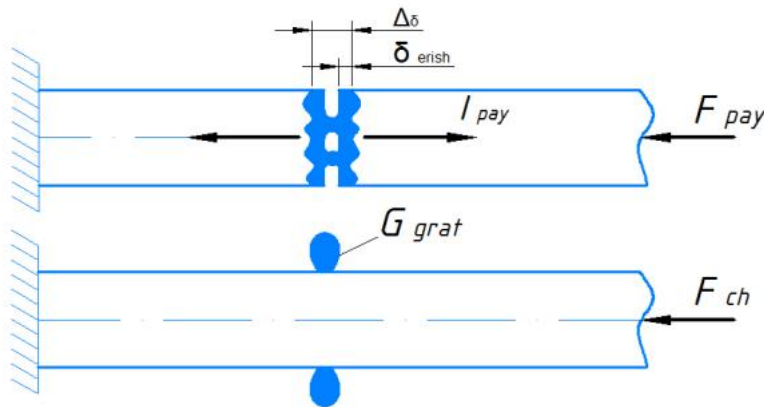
Scheme of joint formation in fusion welding.
